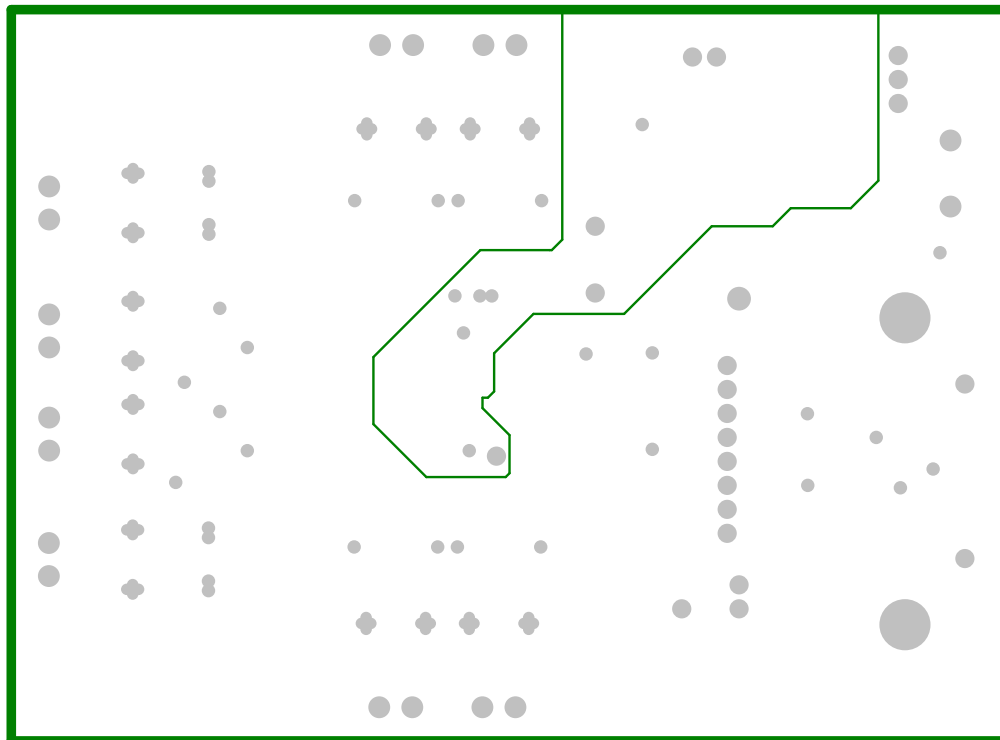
ADS125H18 EVM PCB Layout - Ground Layer 1
